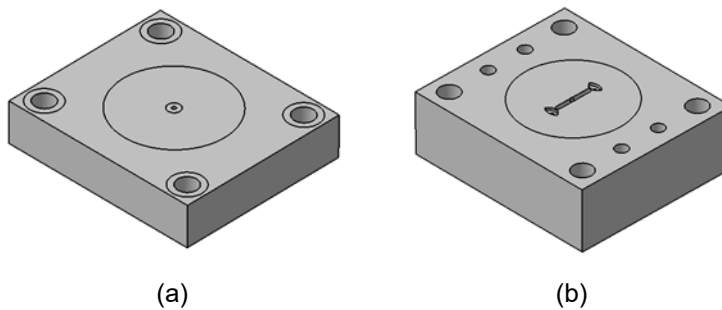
Two plates of molded design; core plate (a) and cavities plate (b)
